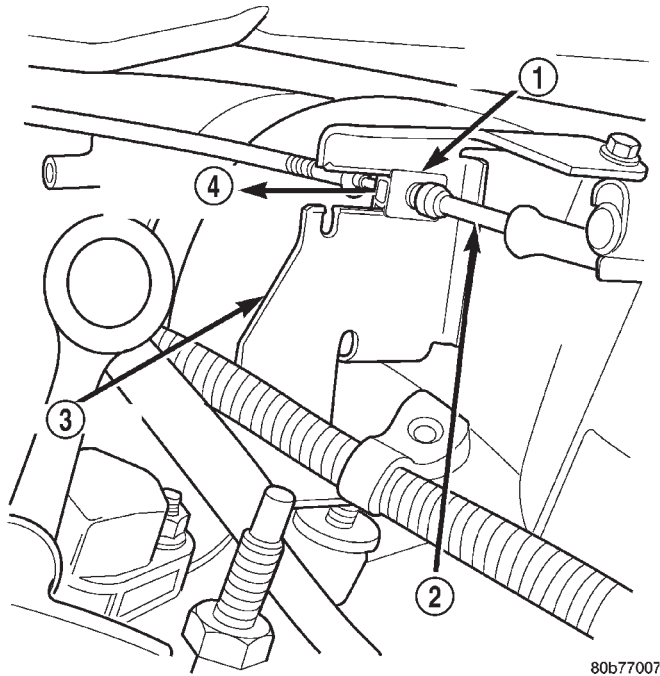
Speed Control Cable at Bracket—4.7L V-8 Engine
